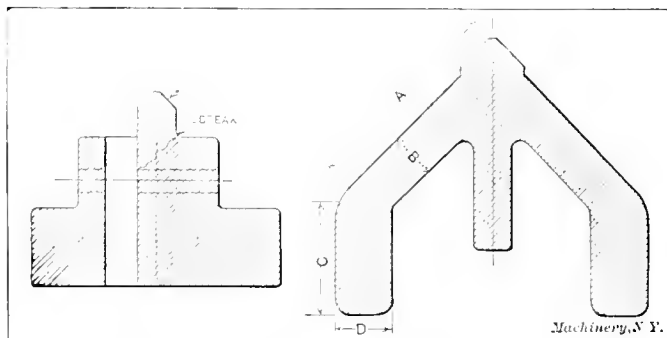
Locking Arrangement for Upright Adjusting Bolt Nut
